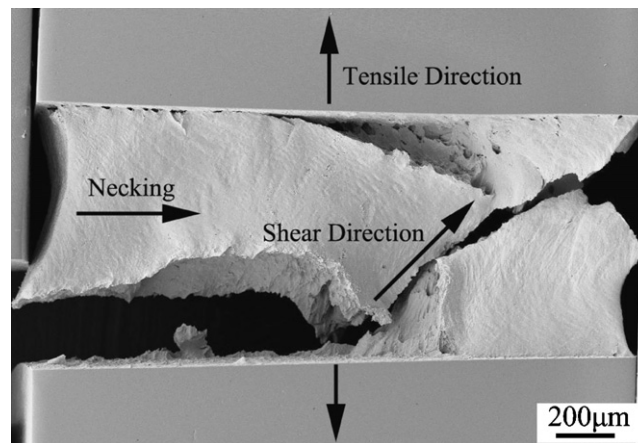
Macroscopic image of cracked solder joints tested at the strain rate of $1.25 \times 10^{-4} \text{ s}^{-1}$.
